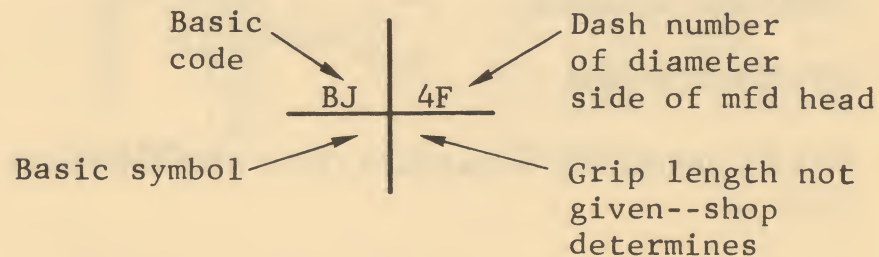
Engineering Drawings (Notes, Symbols and Dimensions (Sheet 1))
